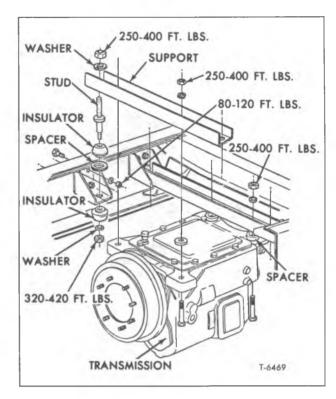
Auxiliary Transmission Mounting (Spicer 7041)
